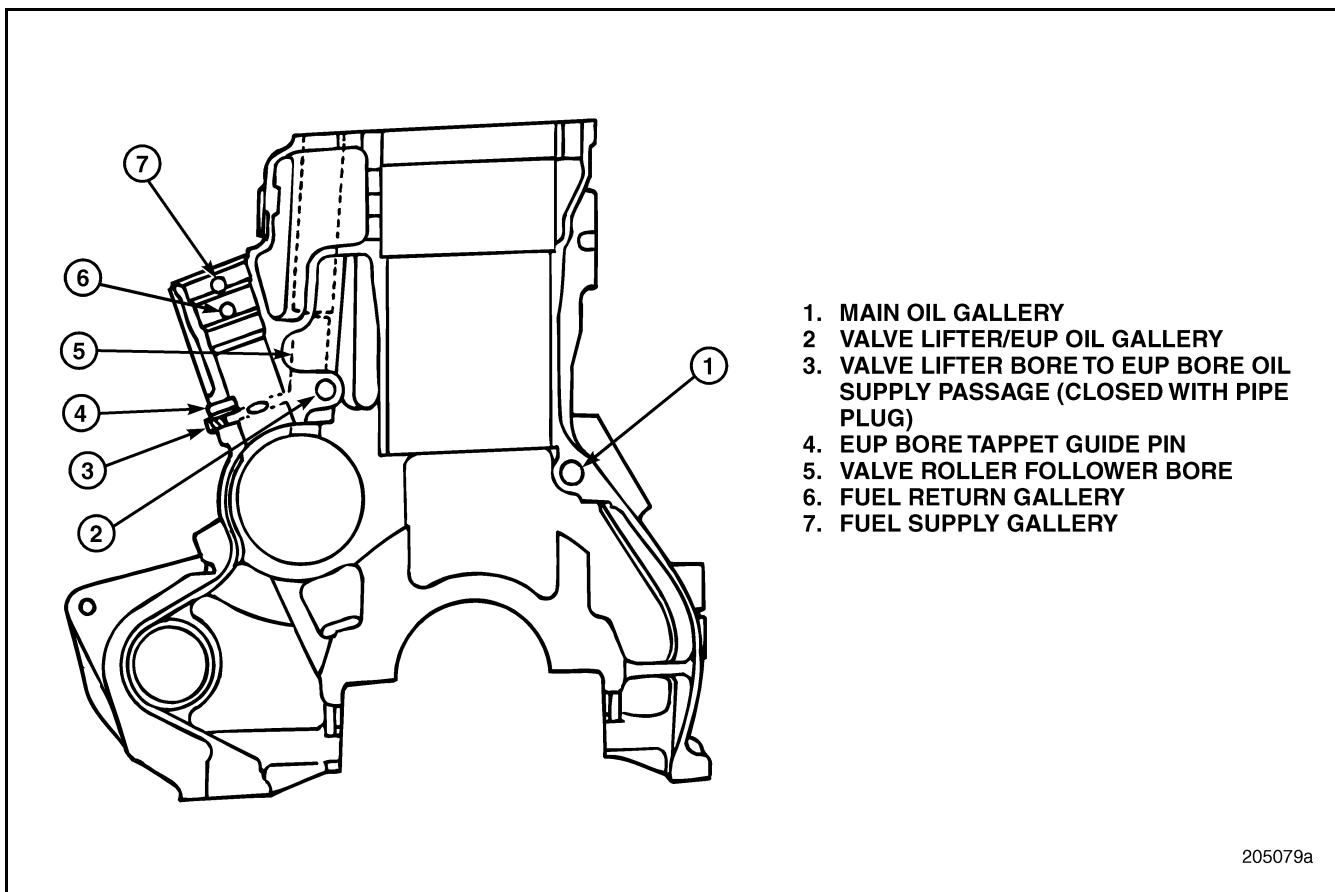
Sectioned View, Front of E-Tech™ Engine Block
